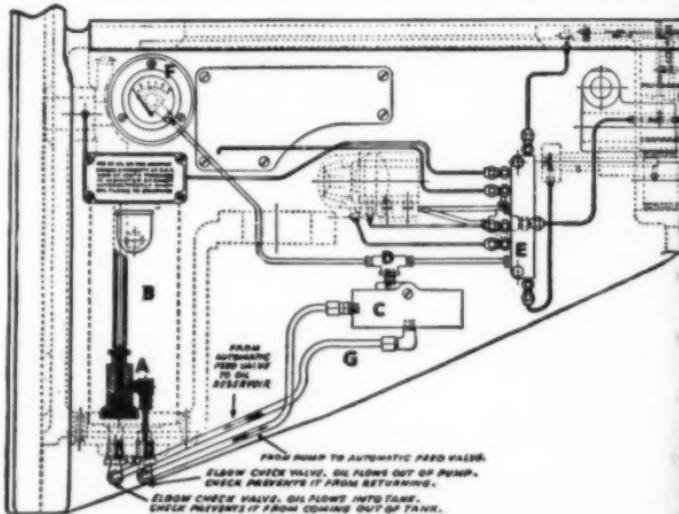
Details of the automatic lubricating system in the knee of the Brown & Sharpe light type milling machine. Plunger pump "A" delivers oil from reservoir "B" to automatic feed valve "C"; thence through fitting "D" to header "E" from which oil tubes lead to all lubricating points. Gage "F" indicates the pressure. "G" is a return or bypass pipe to the reservoir which functions when the system is filled with oil and pressure builds up.
